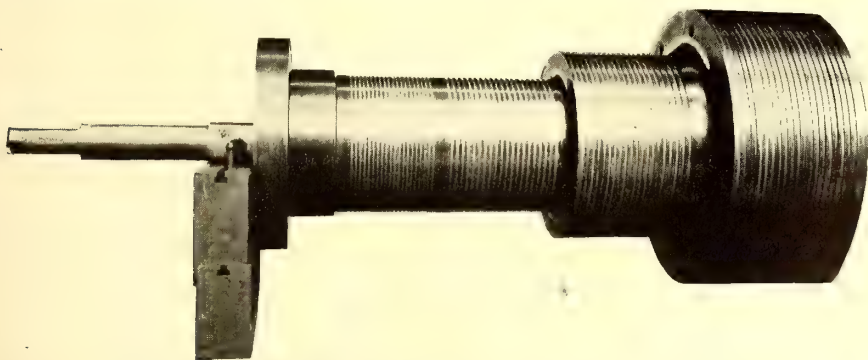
VIEW OF TURBINE SHAFT READY FOR BLADING
